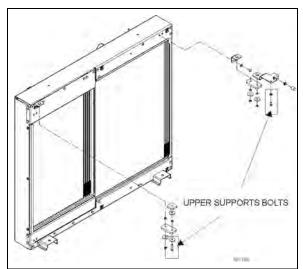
UPPER SUPPORTS MOUNTING BOLTS
